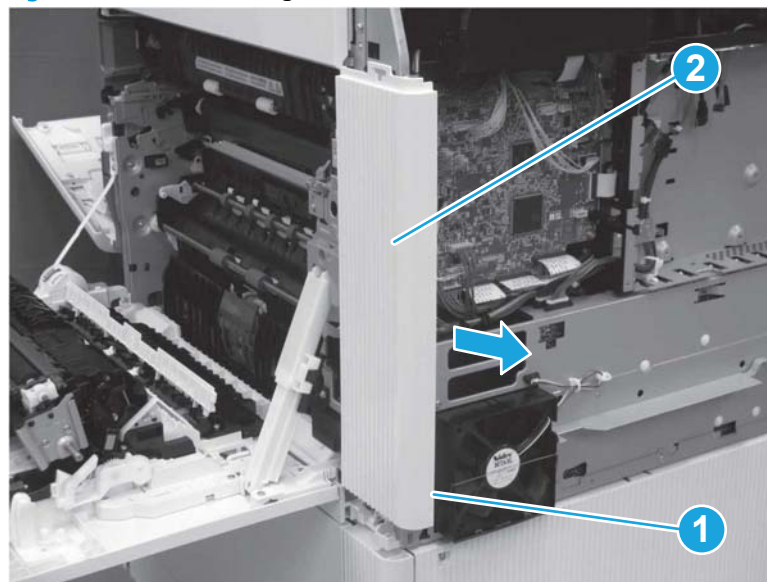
Remove the rear cover (M856/E85055/M776)
